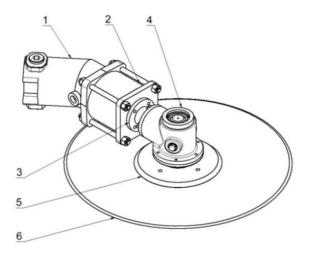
Rear transmission with hydromotor: 1 - axial piston hydromotor, <math>2 - coupler, 3 - extension, 4 - angular gear, 5 - carrier, 6 - cutting disc.
